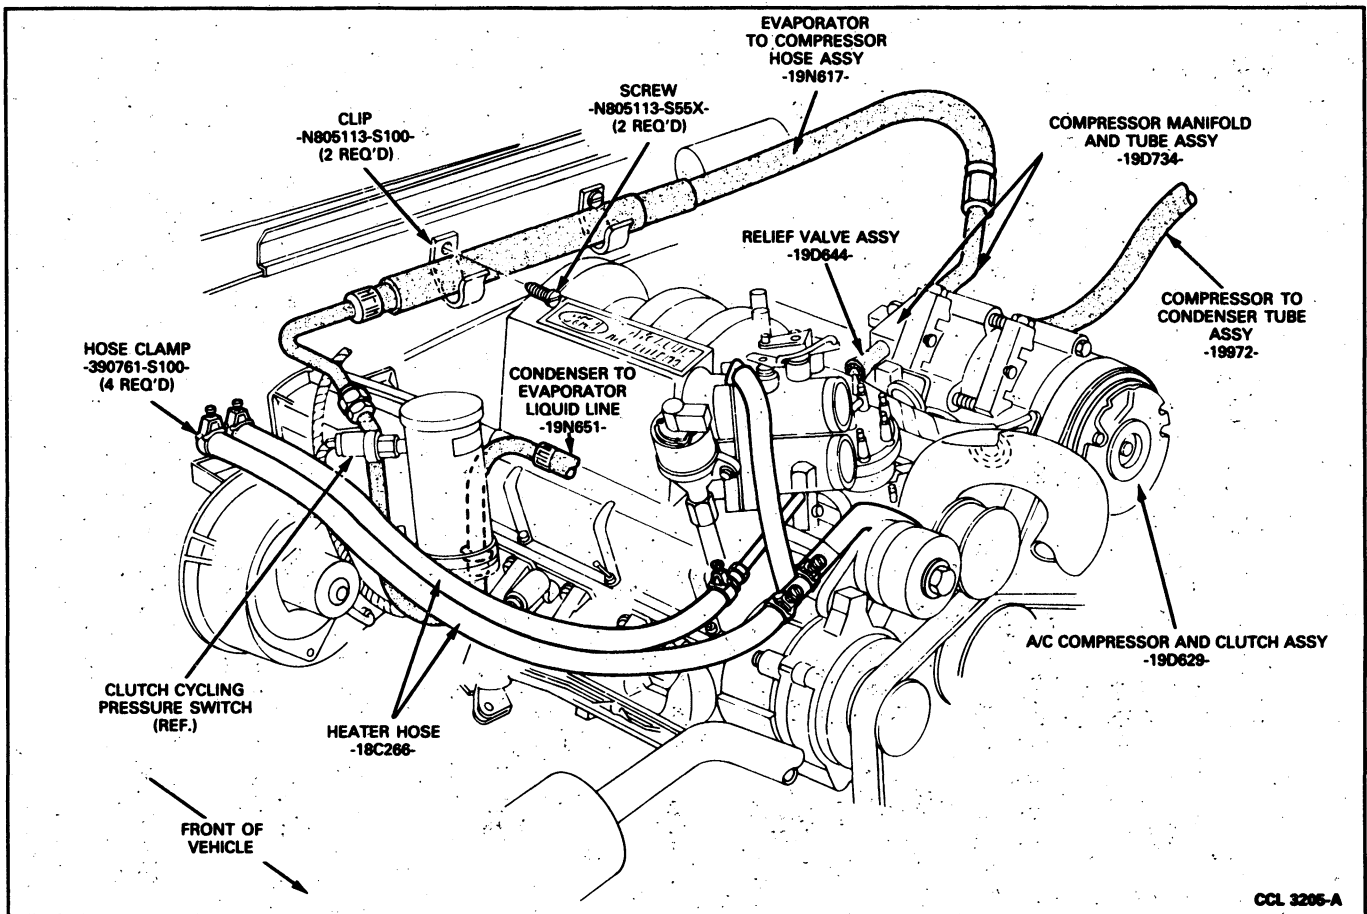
Heater Hose and A/C Line Routing—5.0L Engine
